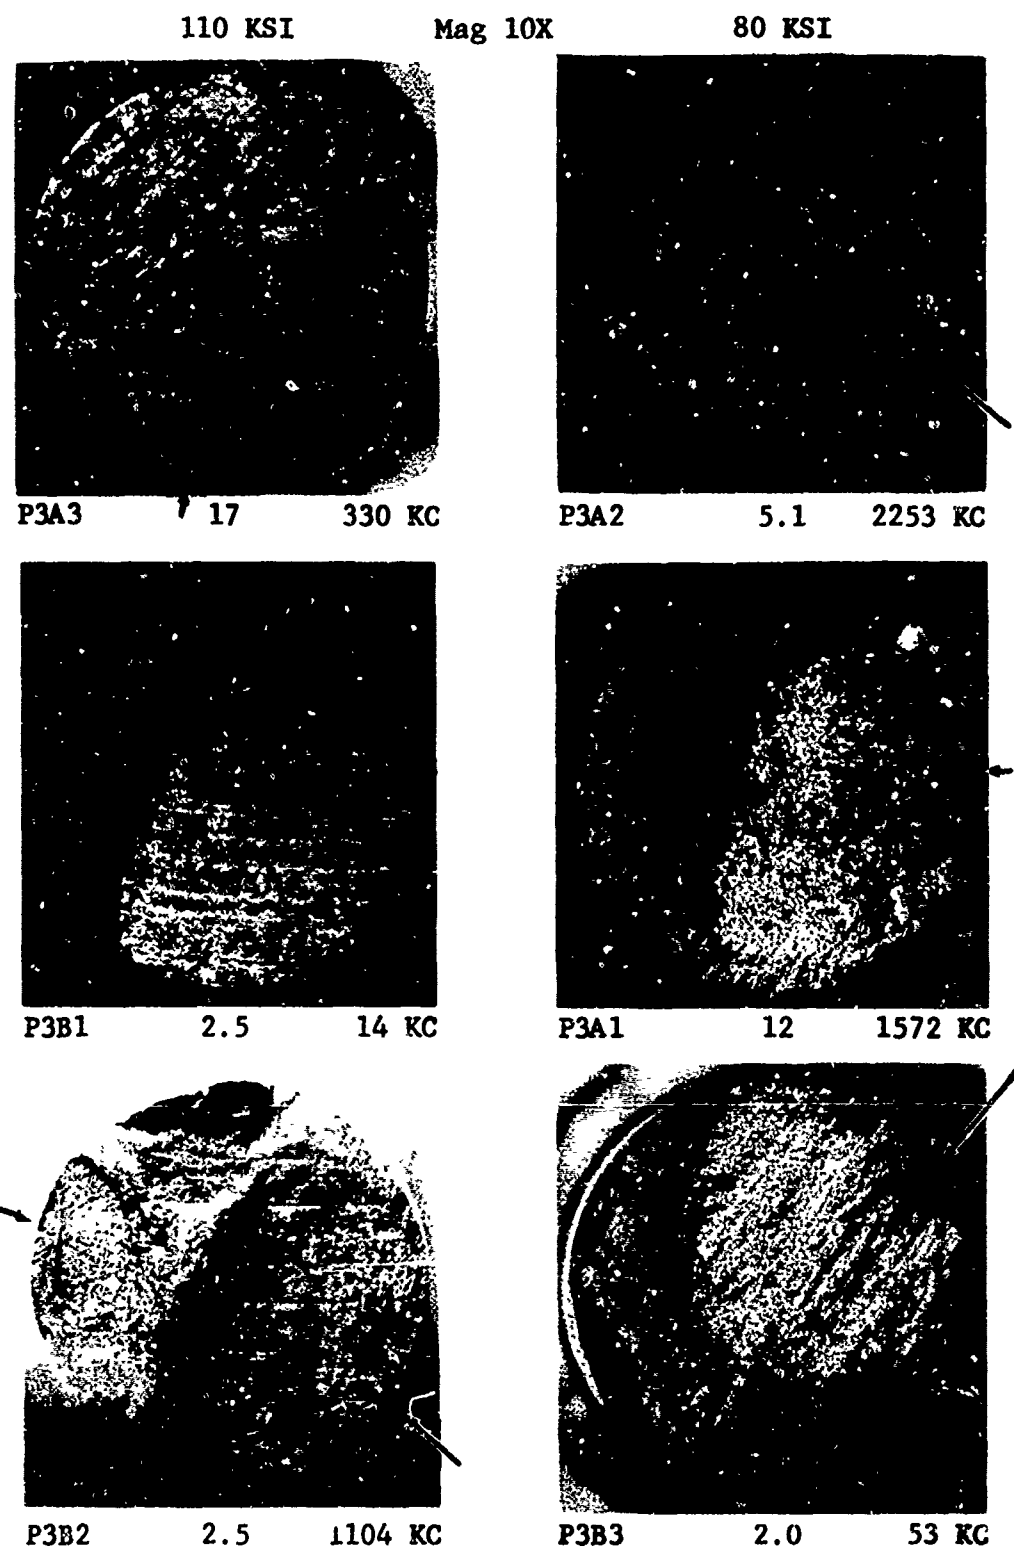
Fracture Surfaces of Failed Fatigue Specimens Series P3-
